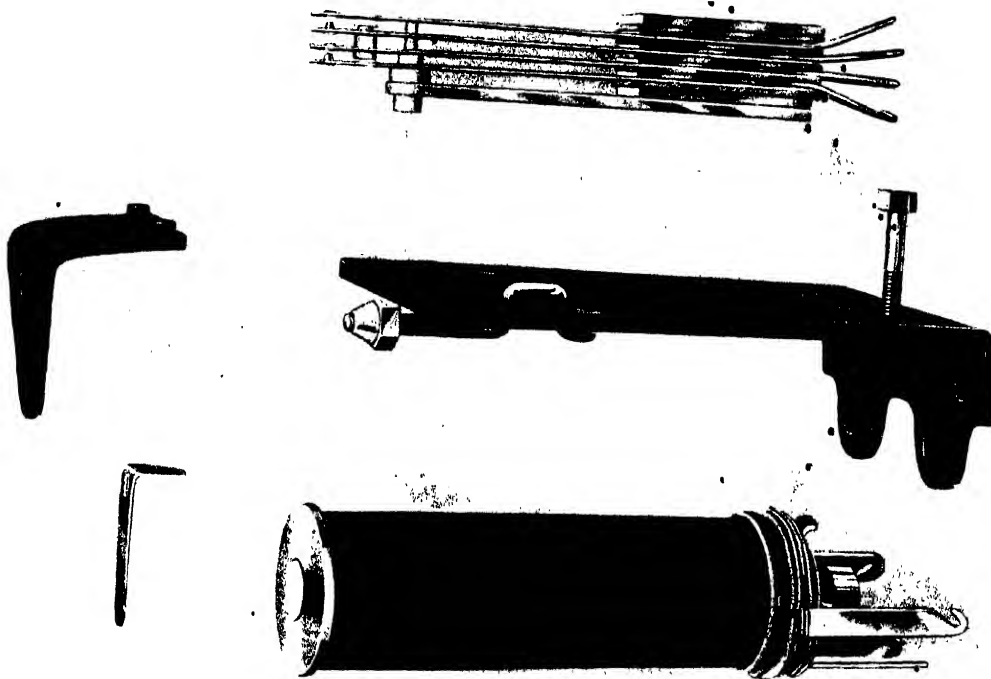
A. R. A. T. CO.'S RELAY, BEFORE ASSEMBLY.
